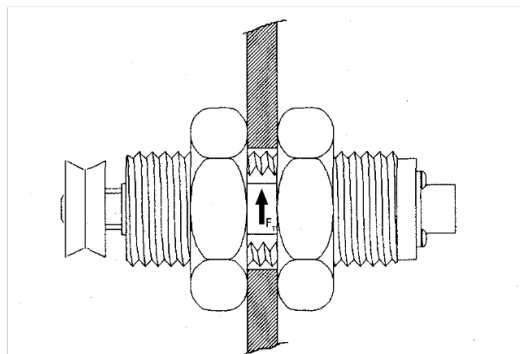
THREADED HOUSING, THROUGH-HOLE MOUNT
